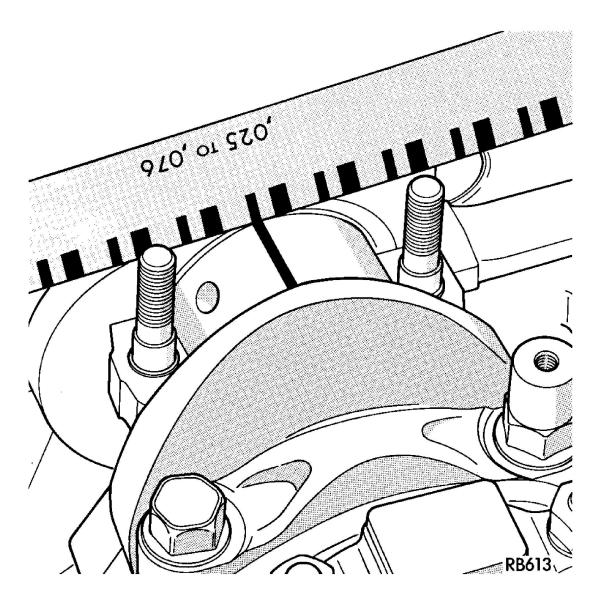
Checking Connecting Rod Bearing Clearance - Typical Courtesy of CHRYSLER LLC
